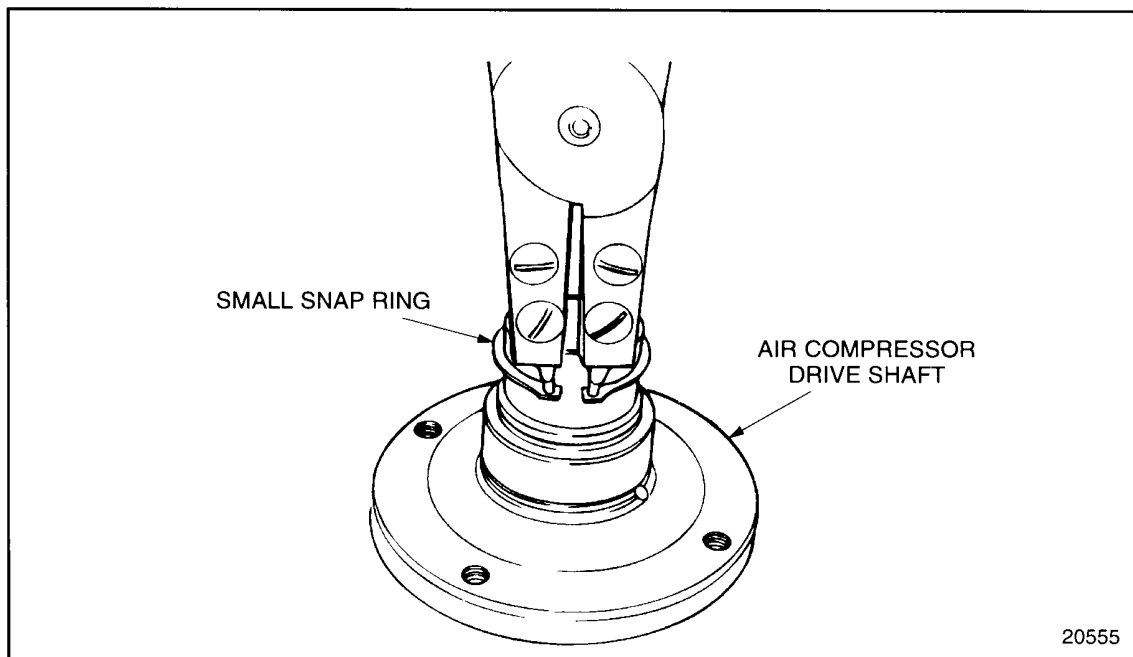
Roller Bearing Inner Race Snap Ring Removal
